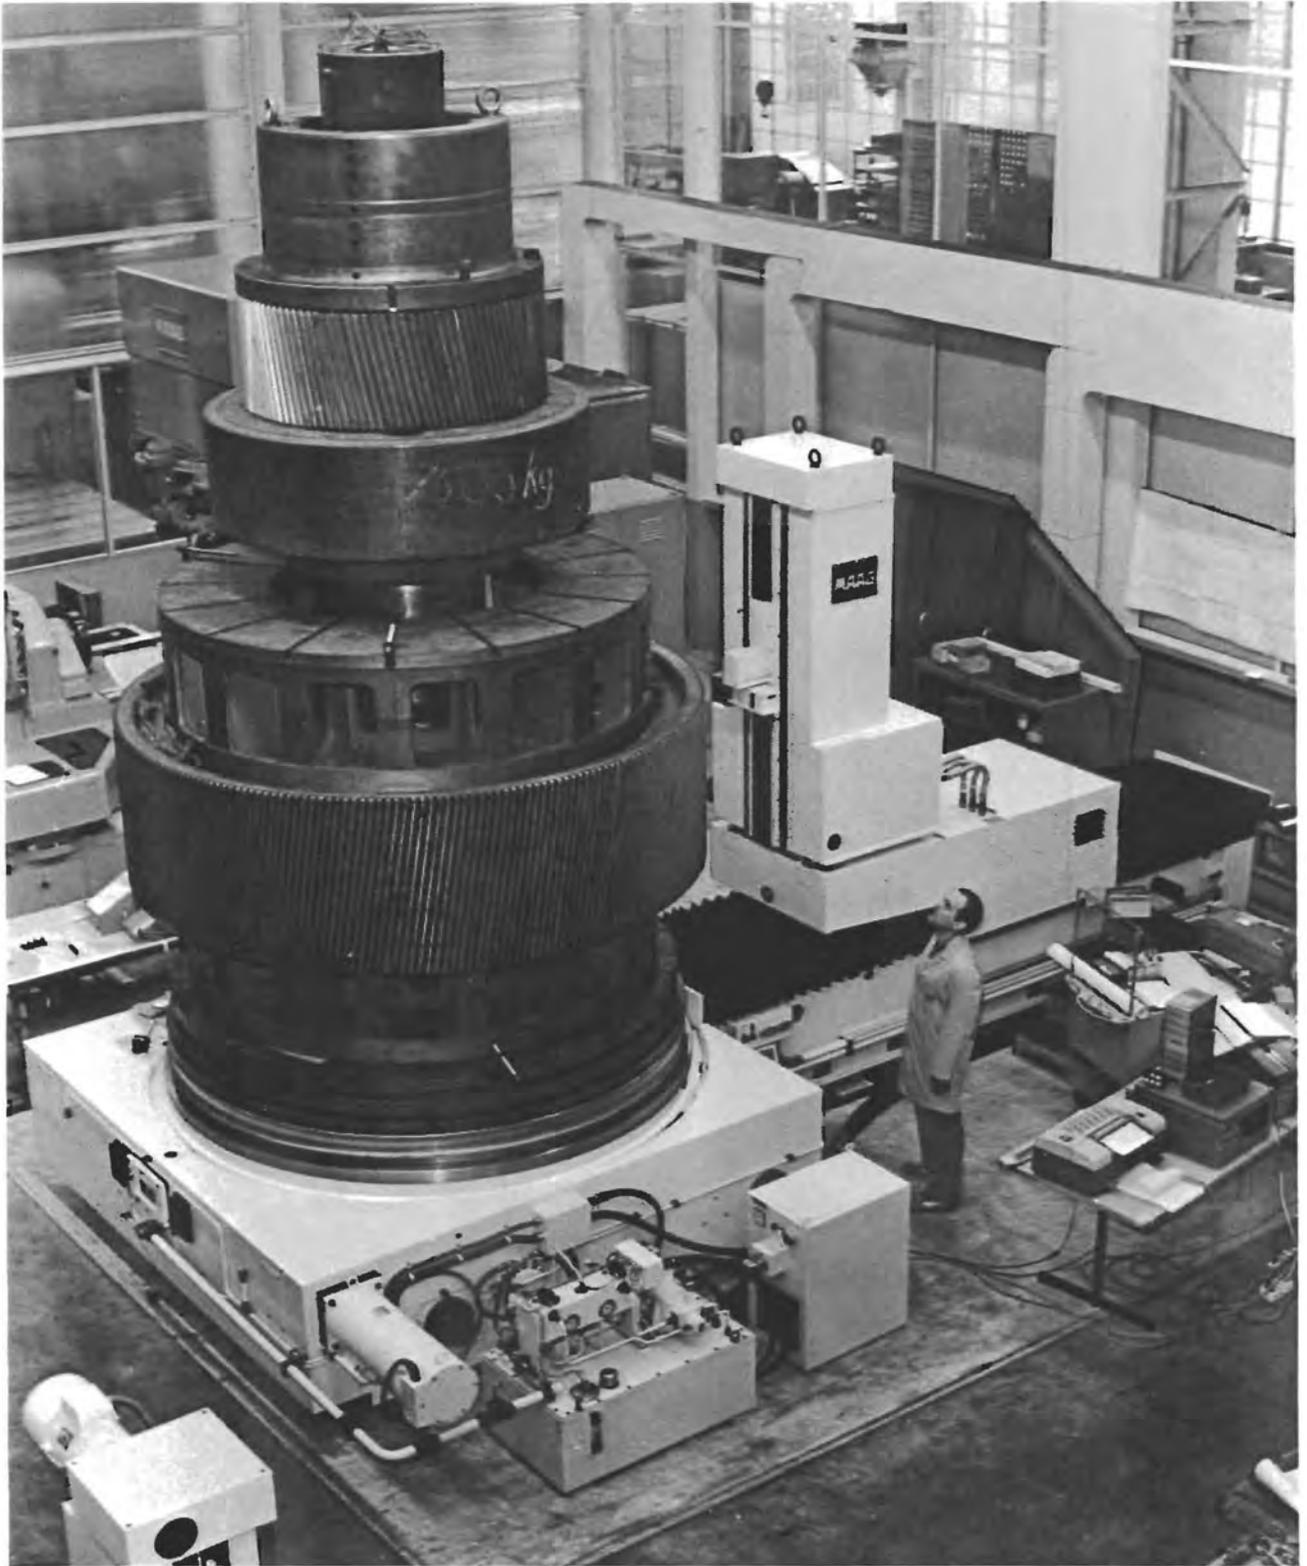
CNC measuring center MCR-500 for large gears. Weight test
